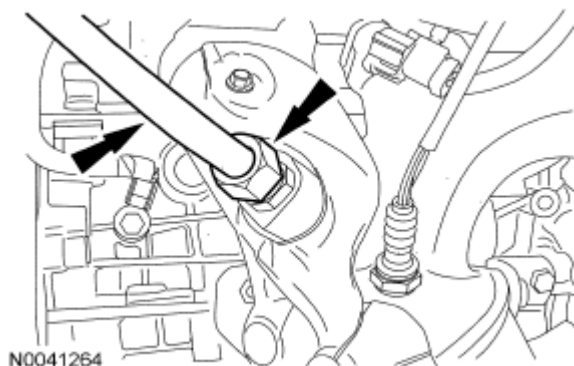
Locating EGR Tube-To-Catalytic Converter Nut And EGR Tube
